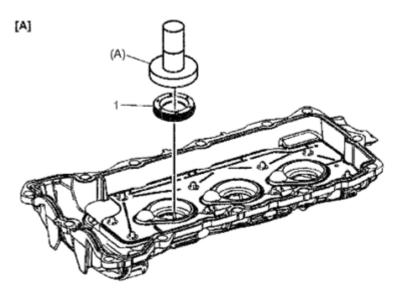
Identifying Spark Plug Hole Gasket Courtesy of SUZUKI OF AMERICA CORP.
